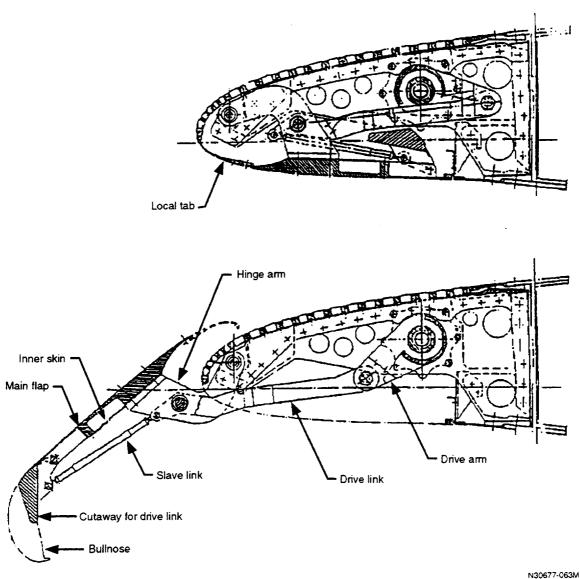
Cross Sections at Typical Flap Support Rib
